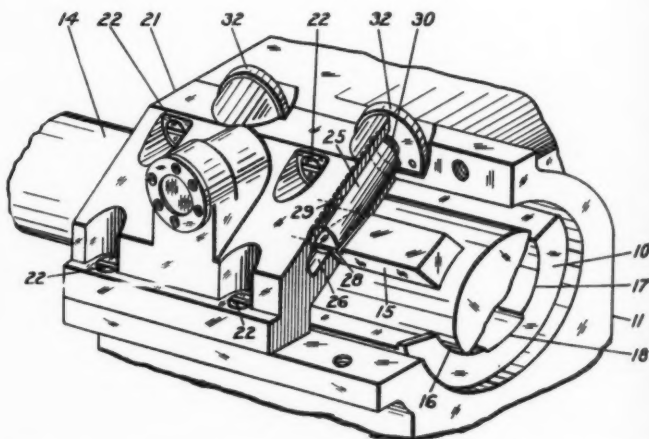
View of automatic adjustable spindle bearing partly cut away to show construction
